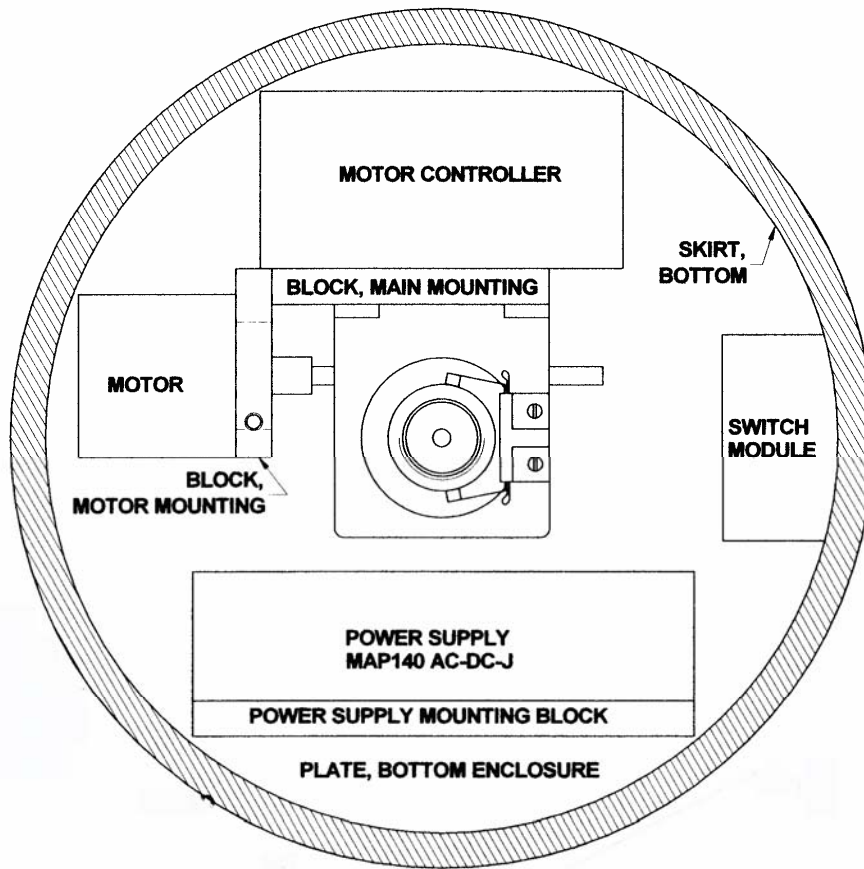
View from the top of the Interior Motor Drive Mechanism
